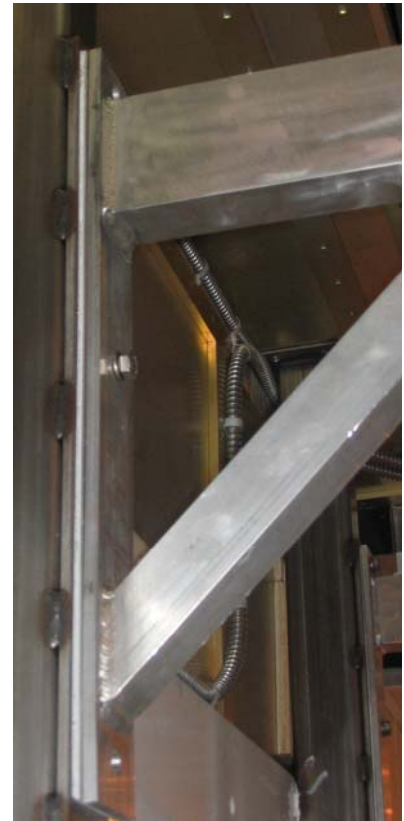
Cross Brace Mounted to H frame RS wall](#)
